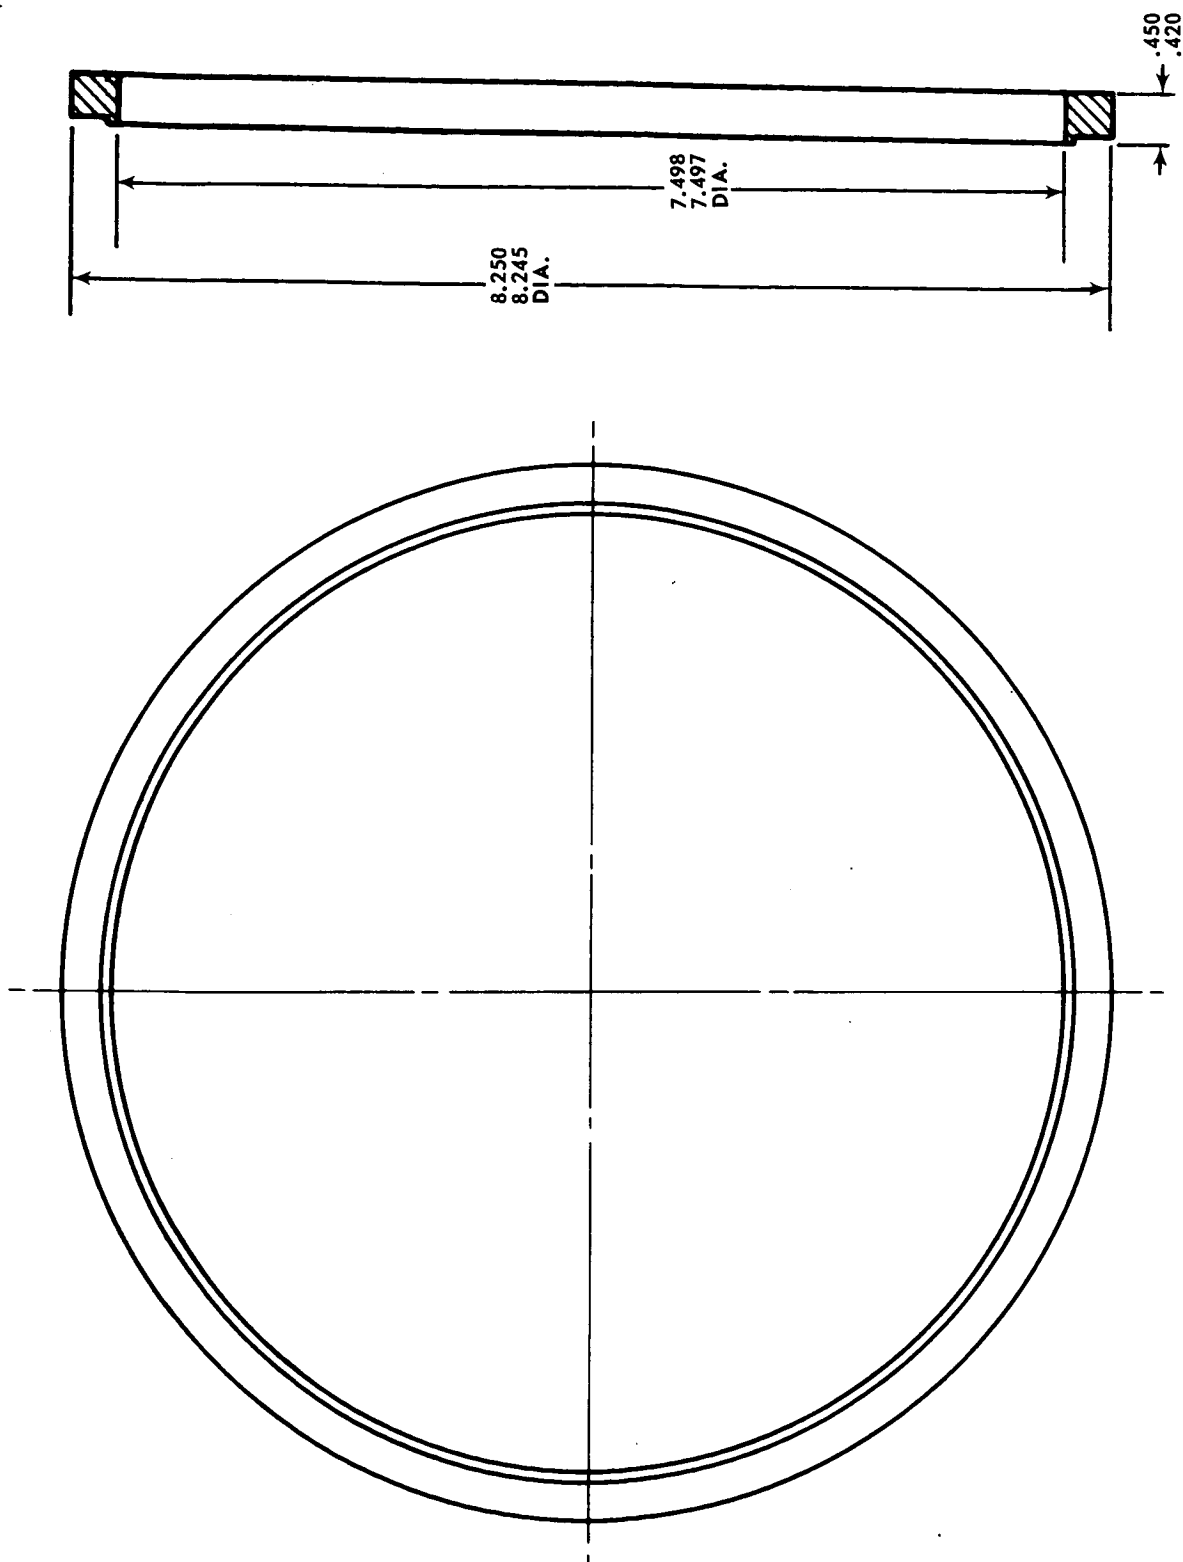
Seal Assembly Band For Face Contact Bellows Secondary Seal
